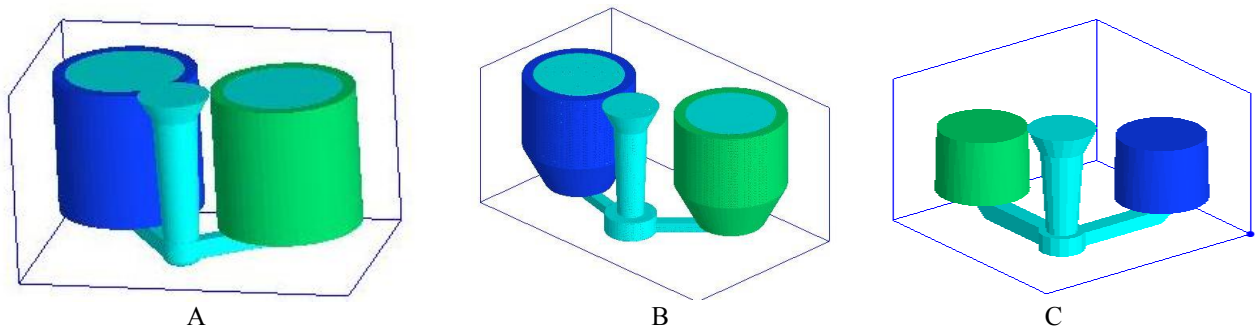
Mold design of (a) open Cylindrical, (b) conical and (c) closed cylindrical feeders sleeves
